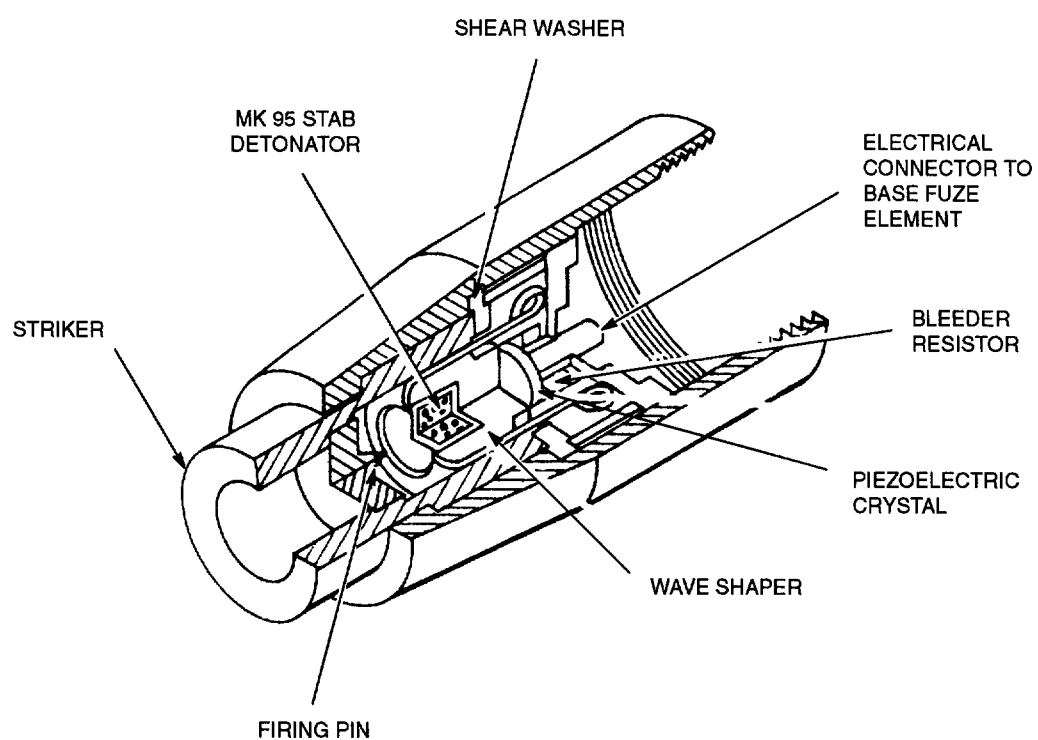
MK 1 MOD 0 Bomb Fuzing System, Base Fuze Assembly - Internal Views
